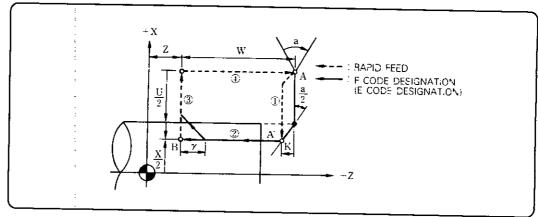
Straight Thread Cutting Cycle (Thread Angle Cutting)
